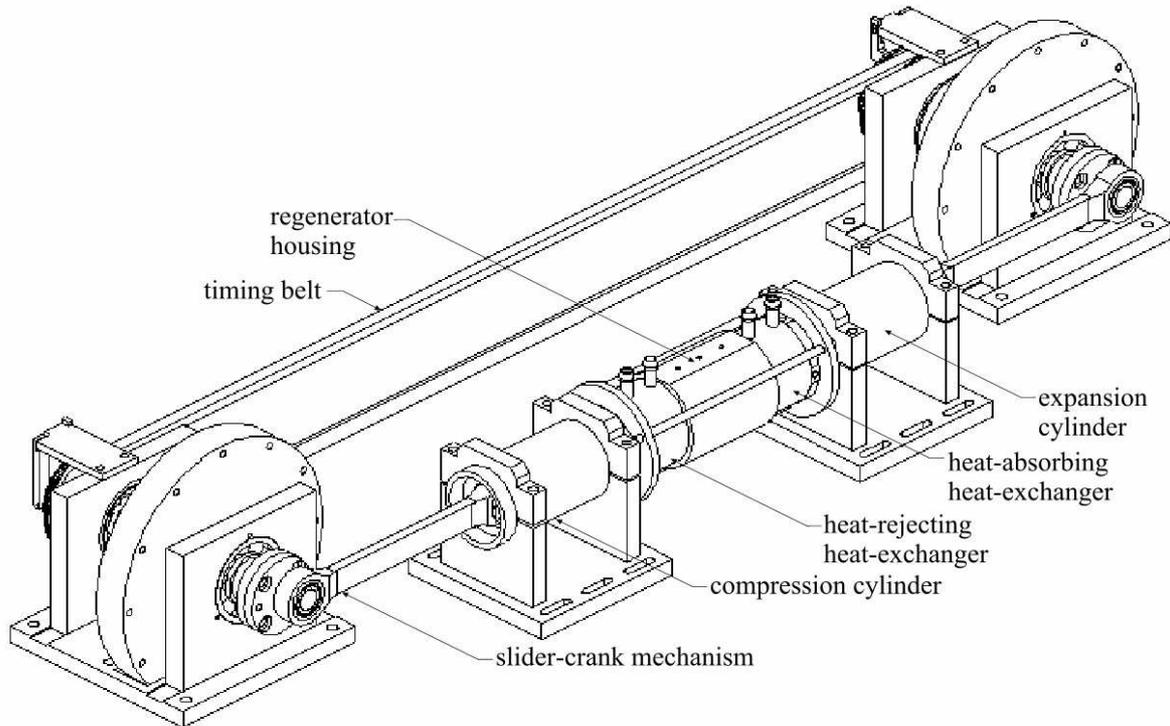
General assembly drawing of MAG1 regenerator test rig.
